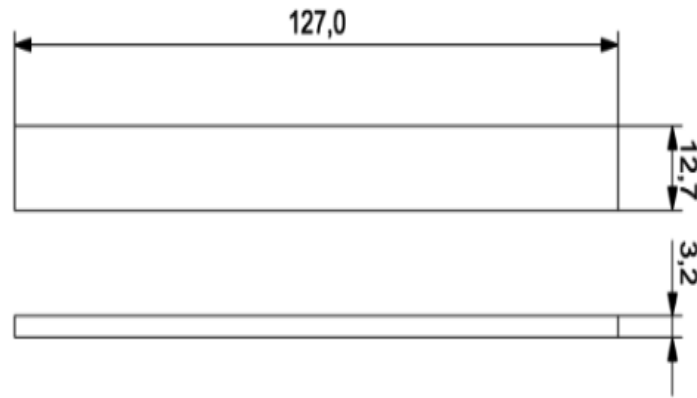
2D dimensions of 3D printed specimens for Bend test. The dimensions and geometry mentioned equate to those prescribed by the standard ASTM D790 bend test specimen.
